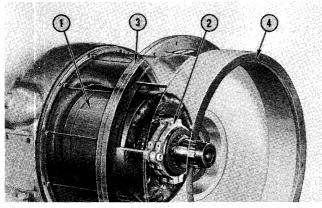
A.C. GENERATOR 1. Rotor 3. Stator 2. Brushes 4. End Bell
